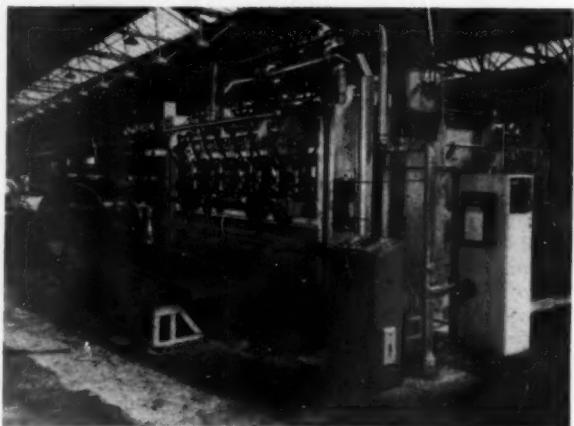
A continuous pusher furnace for heating billets for forging.
